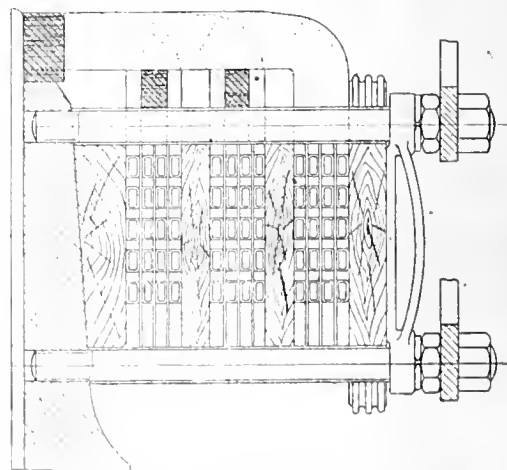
SECTION OF END WINDING, SHOWING METHOD OF CLAMPING.
